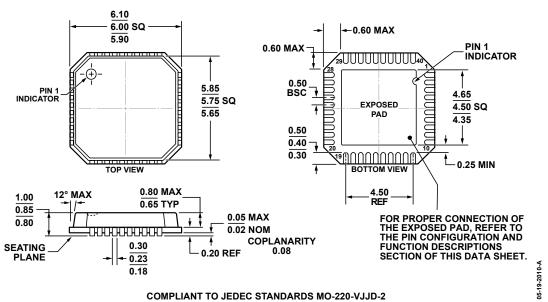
40-Lead Lead Frame Chip Scale Package [LFCSP_VQ] 6 mm × 6 mm Body, Very Thin Quad (CP-40-13) Dimensions shown in millimeters
